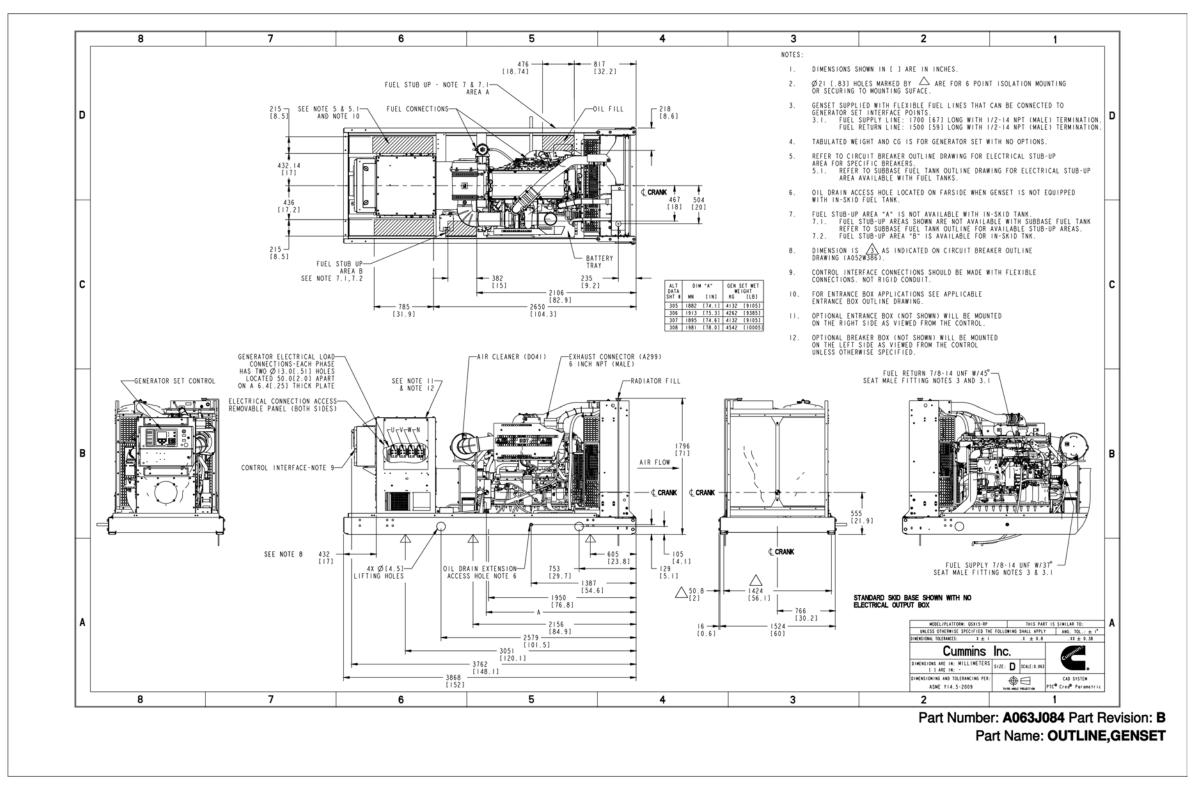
GENERATOR SET OUTLINE DRAWING (SHEET 1 OF 4)
